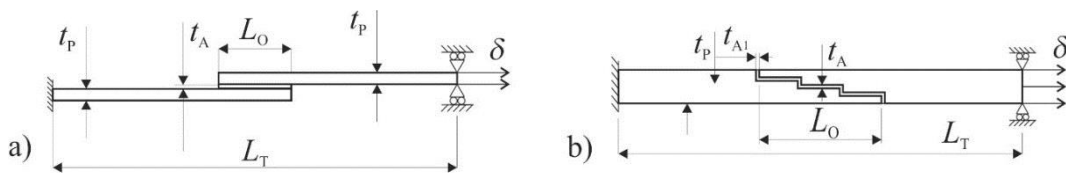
SLJ (a) and stepped-lap joints (b) geometry
